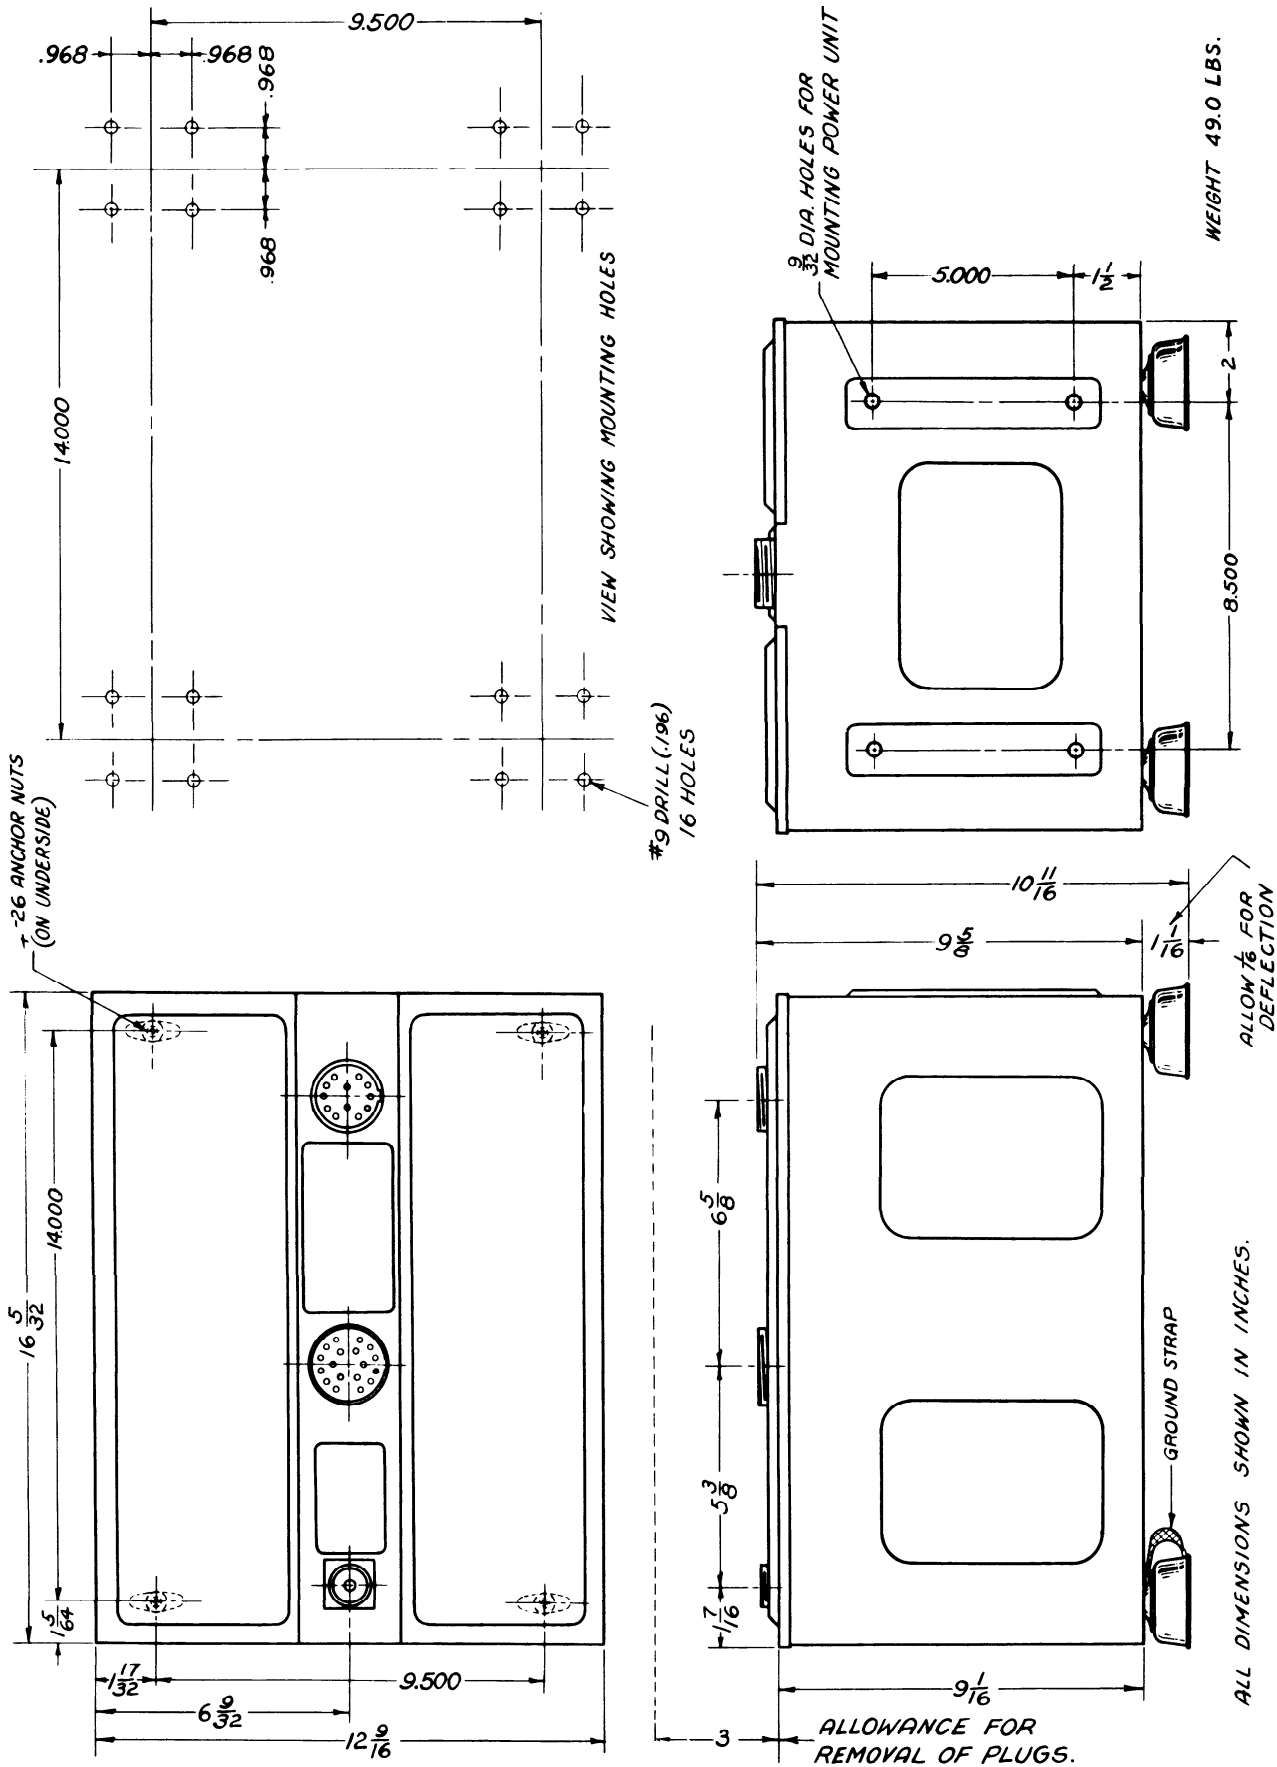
TRANSMITTER—RECEIVER ASSEMBLY, OUTLINE AND MOUNTING DIMENSIONS
